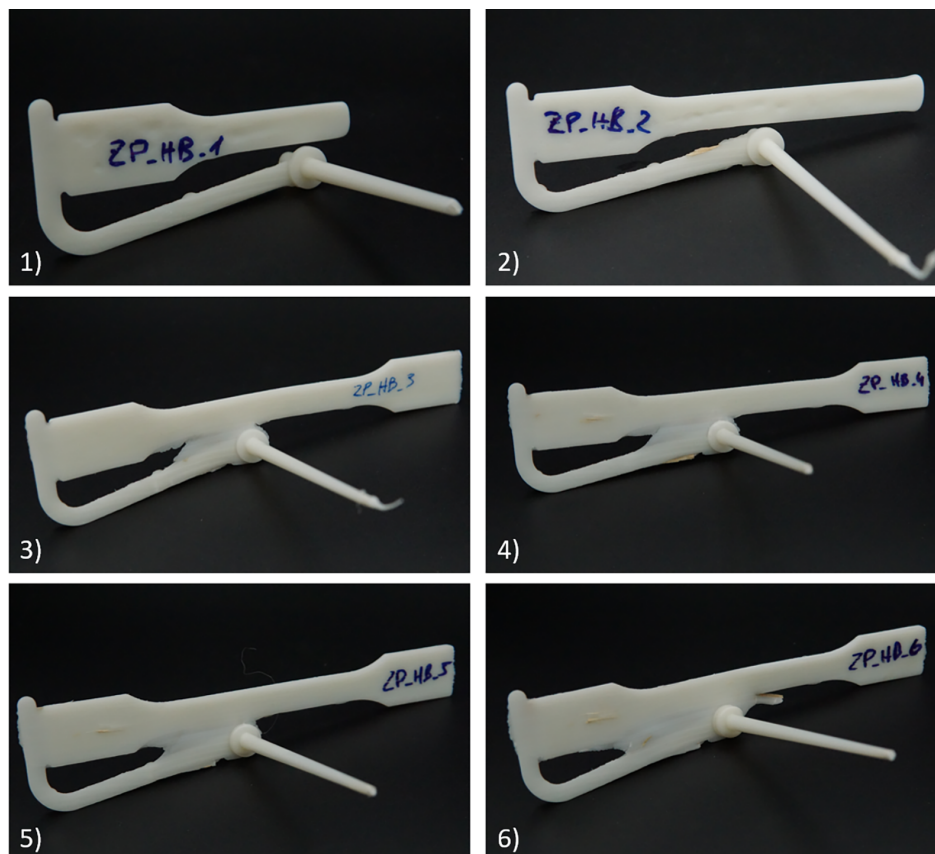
| Progress of produced parts in hornbeam-molds.
